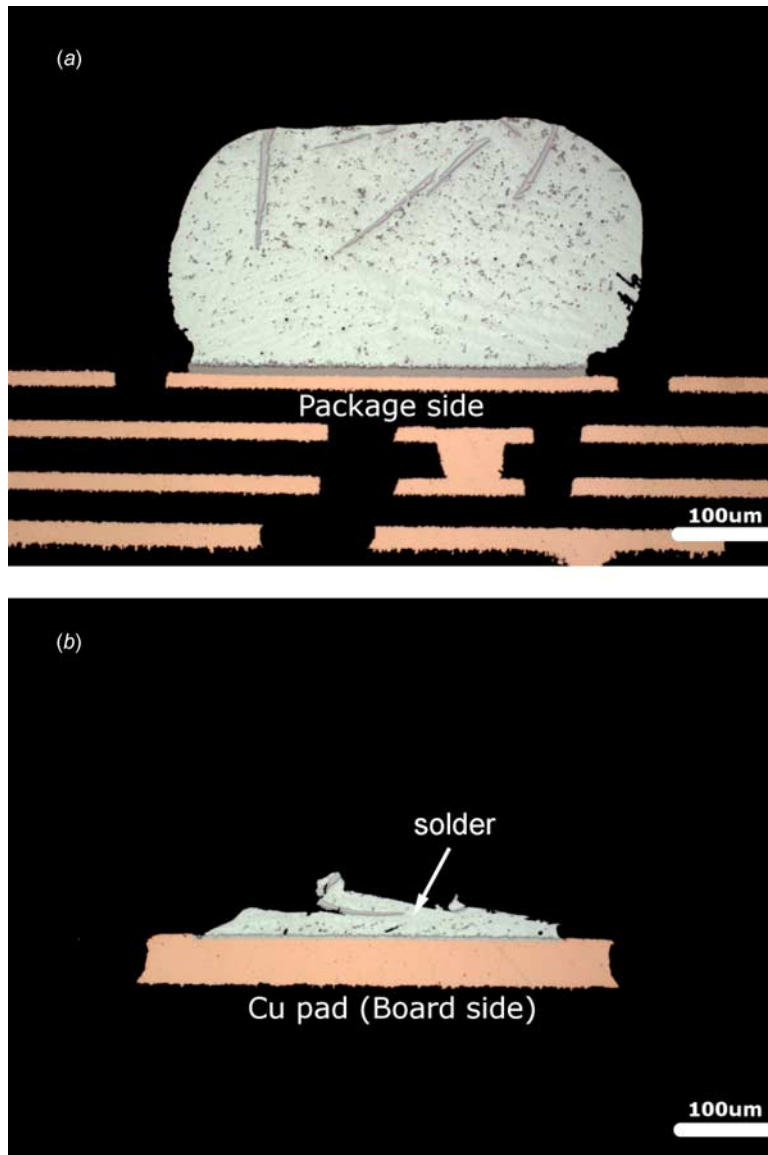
Failure occurs along the solder ball near the solder/IMC interface of board side under the pure shear loading ( $90^\circ$ ): (a) Solder joint at package side; (b) residue Cu pad at board side.
